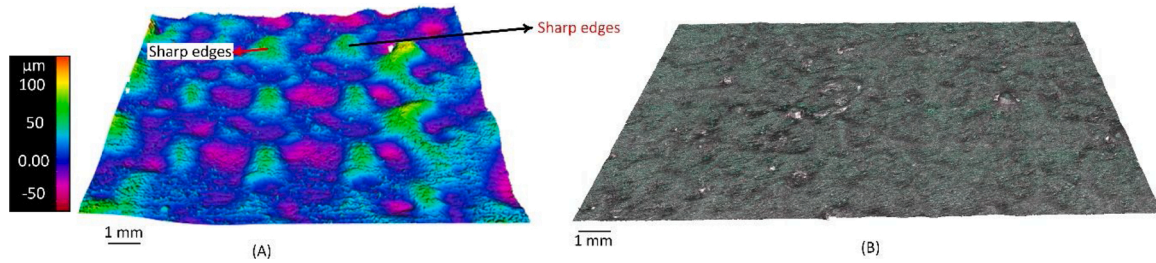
(A) As-built surface (B) Surface after machining for test.
